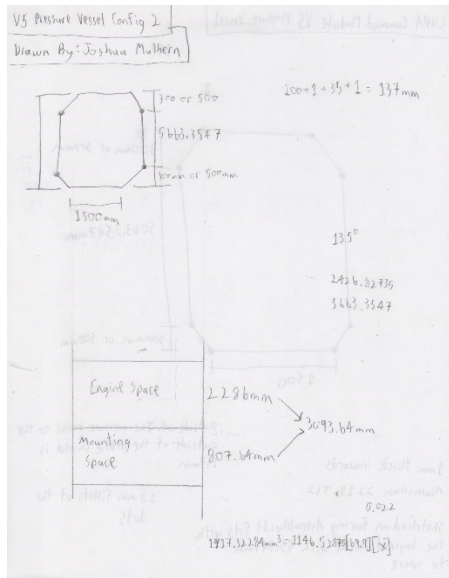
Hand Drawing V5 Pressure Vessel Config 2
